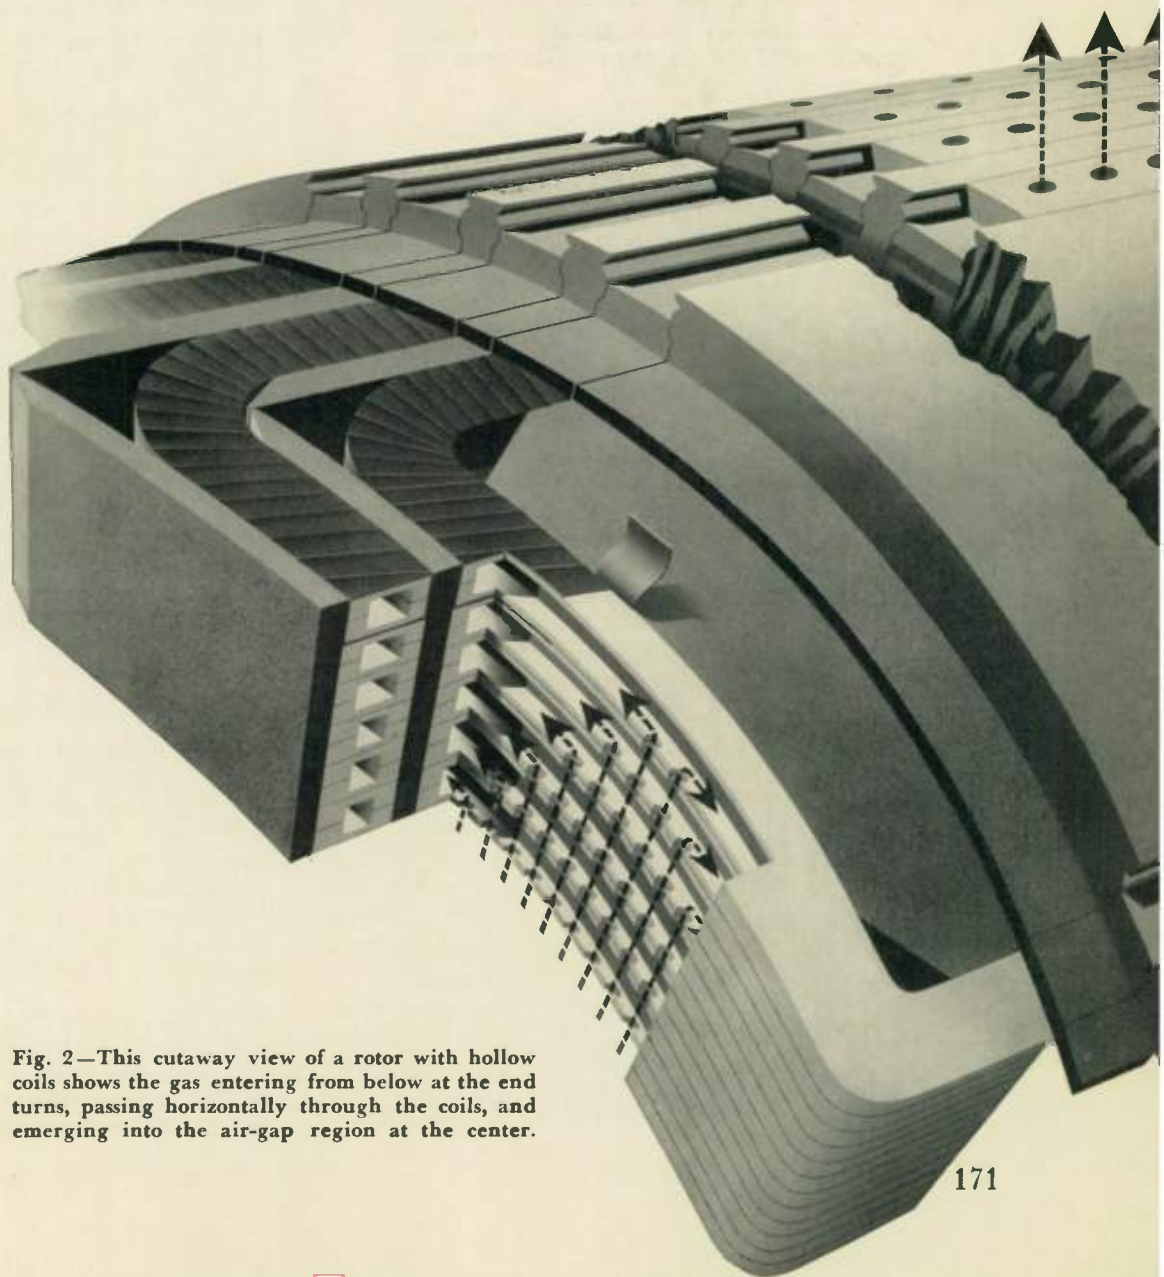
This cutaway view of a rotor with hollow coils shows the gas entering from below at the end turns, passing horizontally through the coils, and emerging into the air-gap region at the center.
